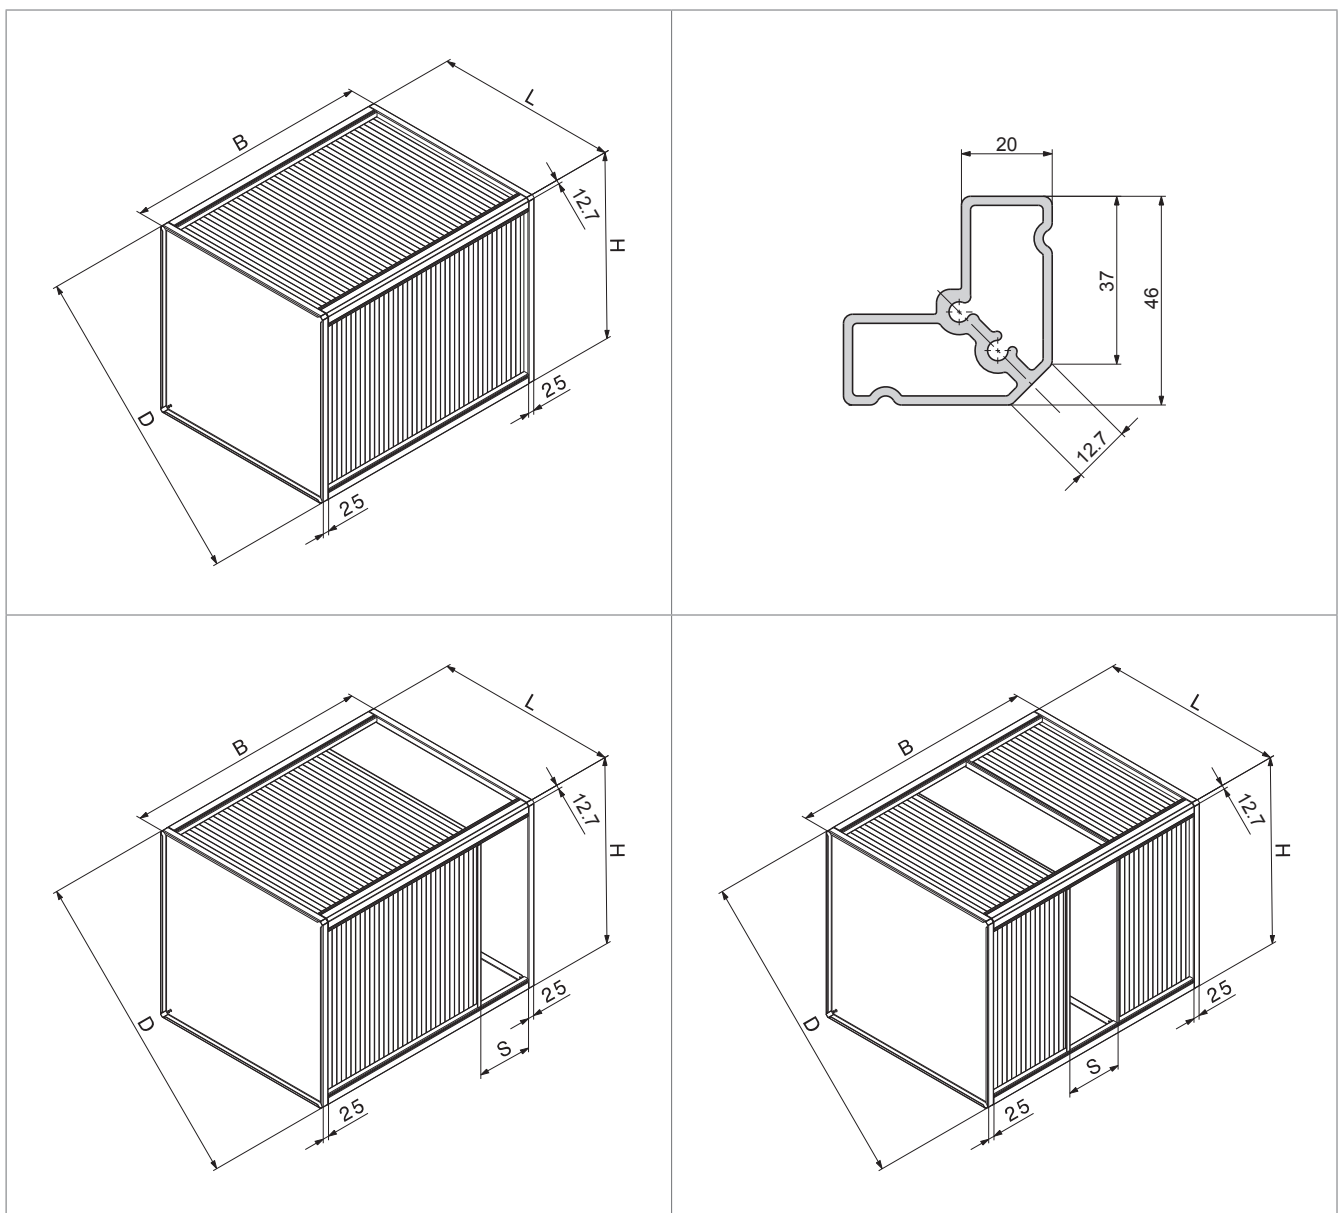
Dimension sheet for Krivan plate heat exchanger without dampers (dimensions in mm)
